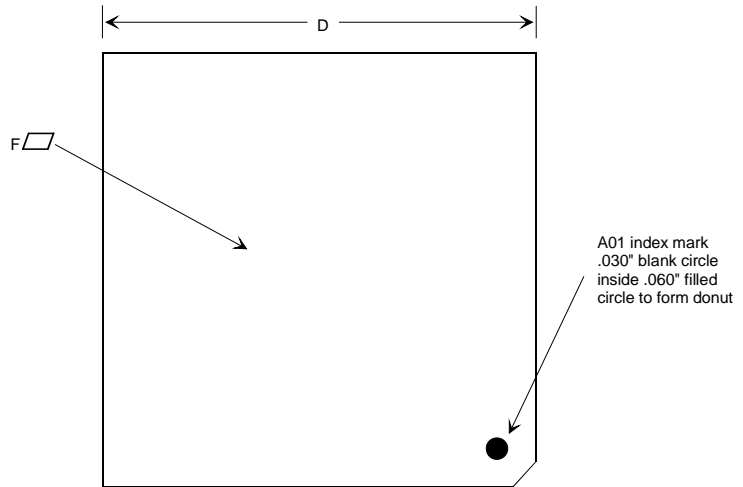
352-Terminal BGA Mechanical Package Outline
